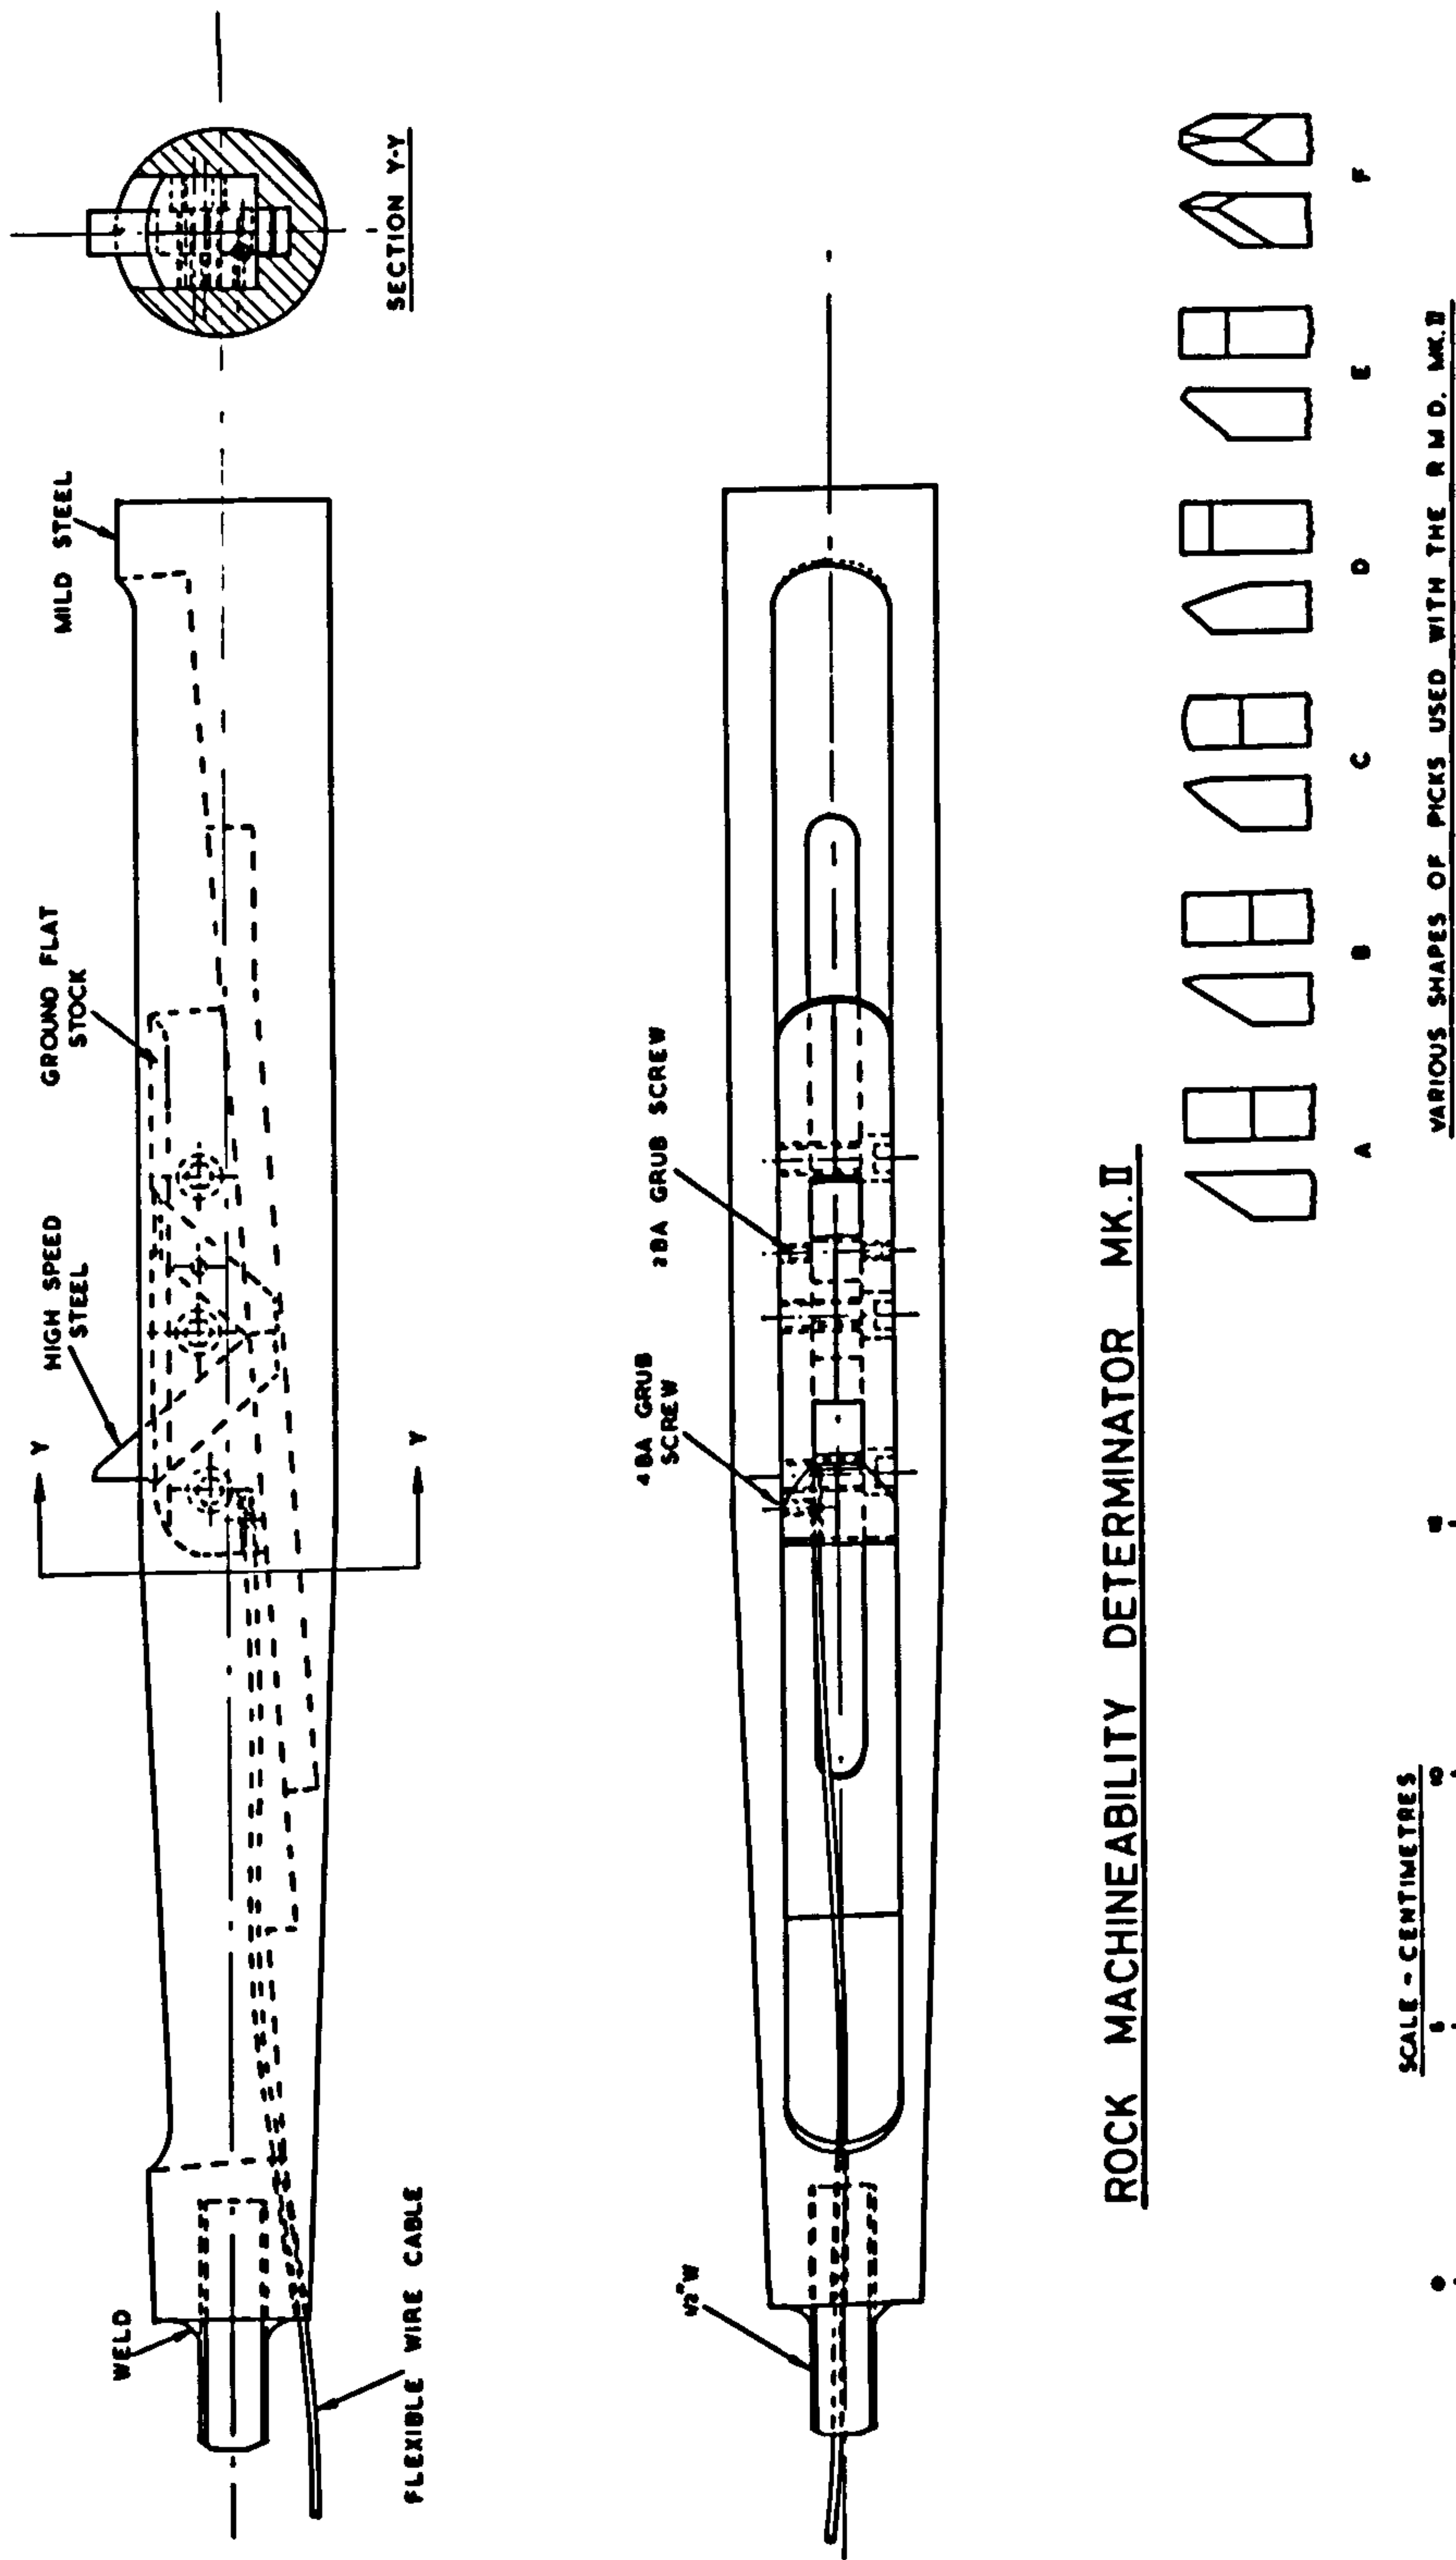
and 7.4 show a slightly modified version of the original R.M.D. Mark II. The instrument was inserted into a borehole. As the body was pulled out, the cutting tool and tool-holder moved up the ramp inside the body which caused the tool to dig into the side of the hole. When the tool had penetrated to a predetermined depth, the tool-holder closed against the end of the ramp and the tool and tool-holder were pulled along the hole with the body. Retraction of the tool was achieved by pushing the body back into the hole and withdrawing the R.M.D. slowly. A wire was attached to the tool-holder and was fed through a hole in the body and out of the borehole. If this was then held taut and fixed, when the instrument was pushed back into the hole the tool-holder was sure to retract fully into the body and this facilitated the withdrawal. This was a much simpler design than the Mark I but in practice it proved to have some limitations.
